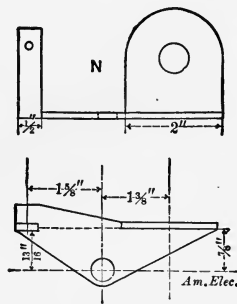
ELEVATION AND PLAN OF BRASS FRAME.
